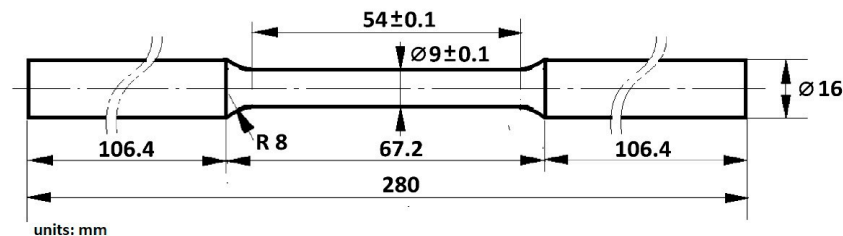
Dimensions of tensile test specimen based on ASTM E8M.
